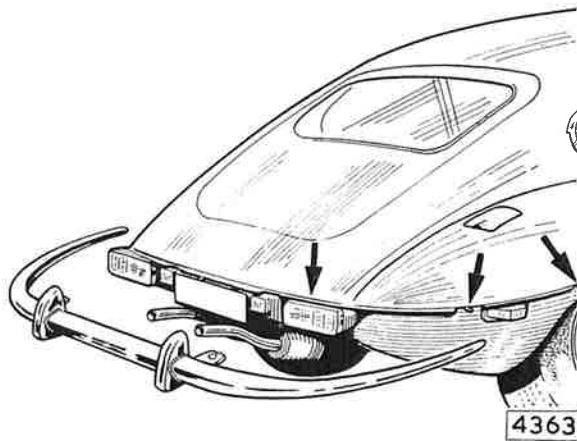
Rear bumper removal. The arrows indicate the mounting points.
